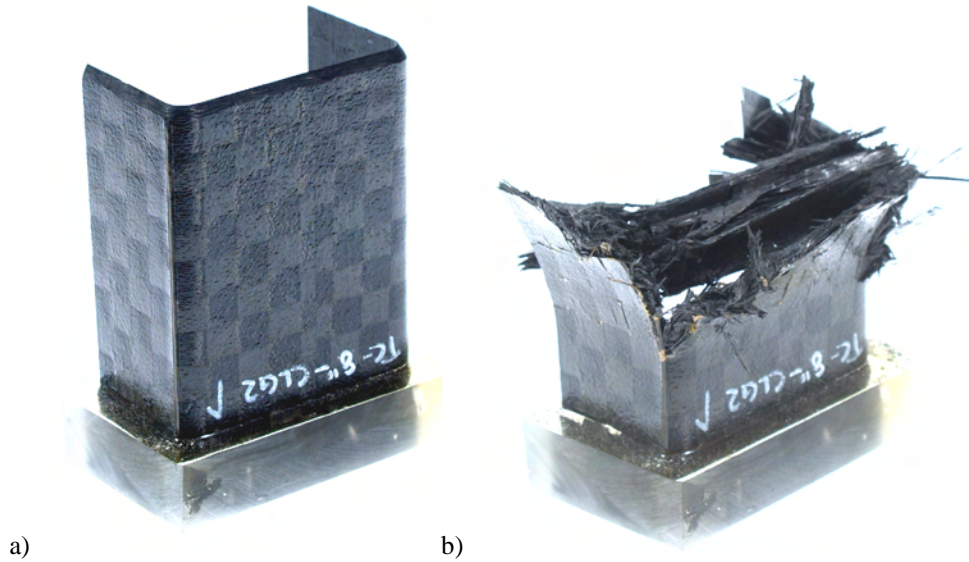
Large C-channel, specimen II, before (a) and after crush testing (b).
